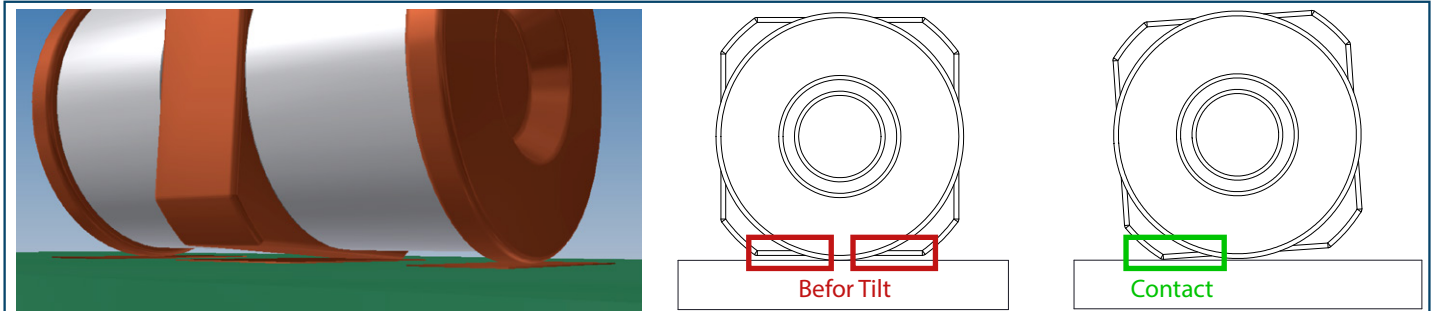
| Images showing the tilt effect, with all three electrodes making contact with their respective PCB solder traces
